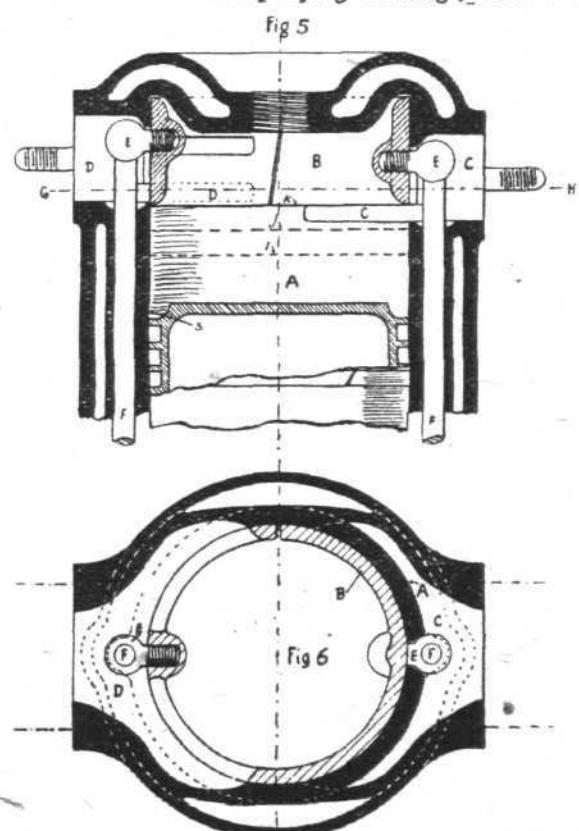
shows a vertical section through cylinder and ring with the exhaust port open.
